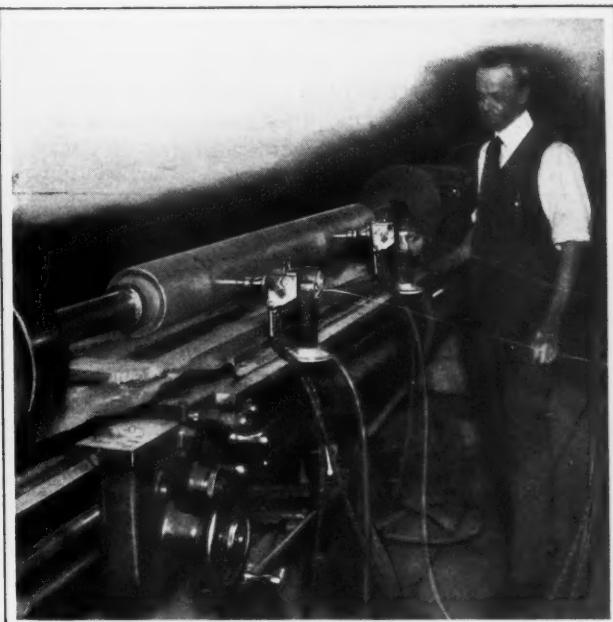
Use of Two Metal Spraying Tools in Conjunction with Lathe for Copper-coating a Cast-iron Roll 5 Feet Long
